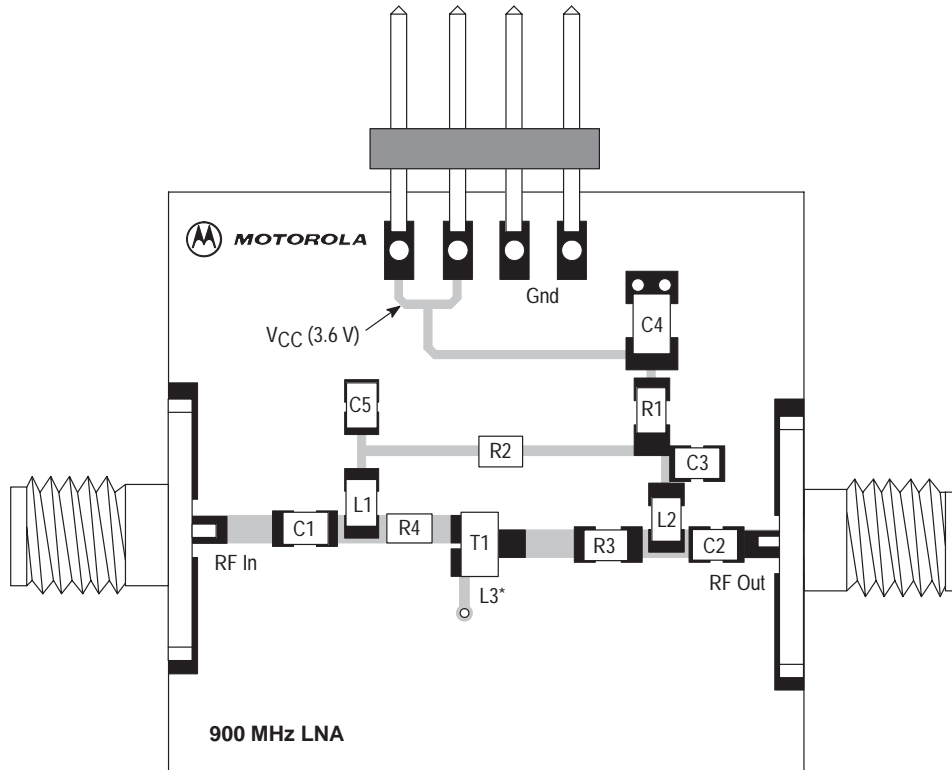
shows the printed circuit board layout and parts placement for the second stage, and Table 2 shows the list of components used on the LNA demo board second stage.
